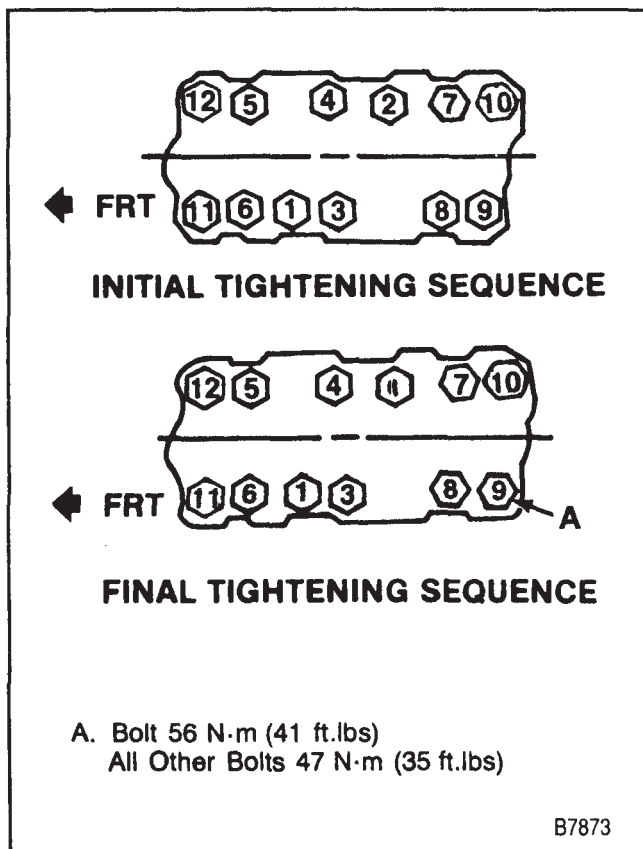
Intake Manifold Bolt Tightening (VIN Z Engine) Sequence
